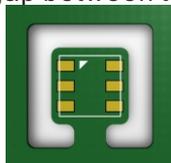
The top view of AHT21 printed circuit board, the design of the milling slit is added in the figure, The heat transfer can be reduced to a minimum.
